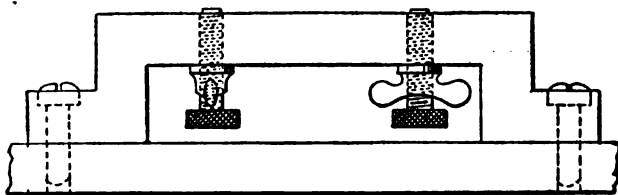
Fixture for Supporting Piece Shown in Fig. 27
